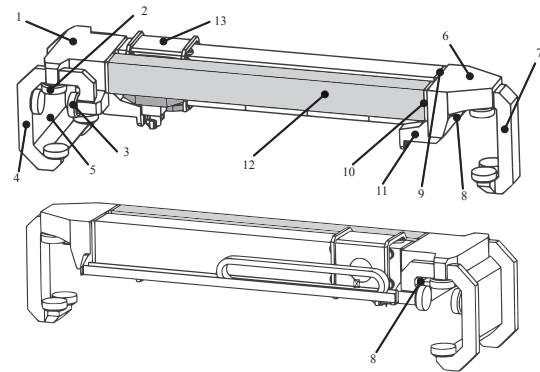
y -stage assembly. 1: position frame, 2 & 3: air-bearings, 4 & 5: pre-load frame, 6: position frame, 7: pre-load frame, 8: linear motors, 9: guidance beam support interface, 10: metrology beam support interface, 11: linear encoder read-head, 12: SSiC metrology beam, 13: x -stage.
